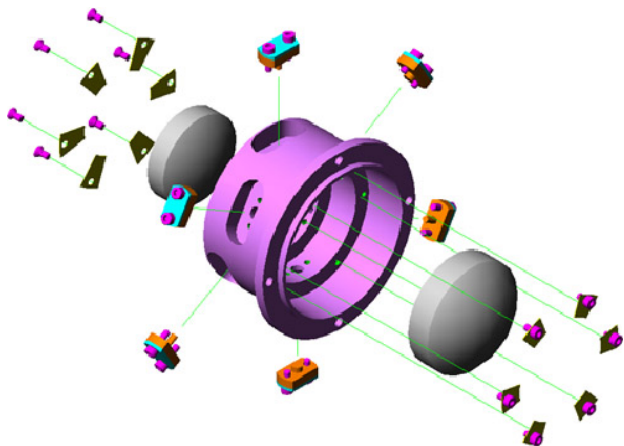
Exploded view of the lens-mounting techniques (showing two lenses using a double-sided custom aluminum lens holder).
